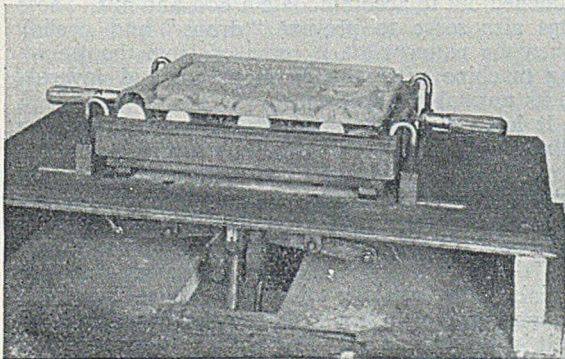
Stripping a Cured Half mould, using Spring-loaded Pins.
